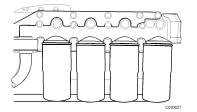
LUBE OIL FILTERS Upper Right Front of Engine
